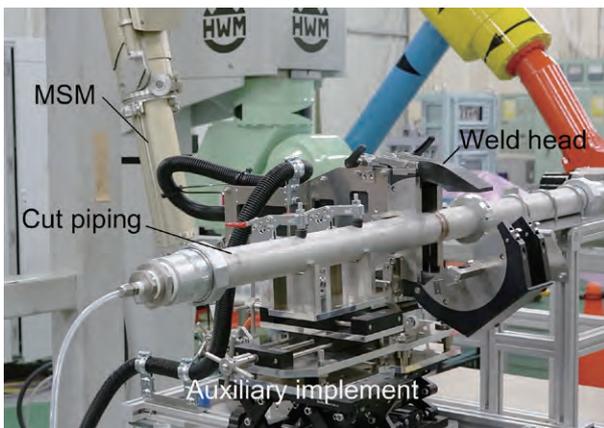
Photo of the release procedure of the weld head after welding.
